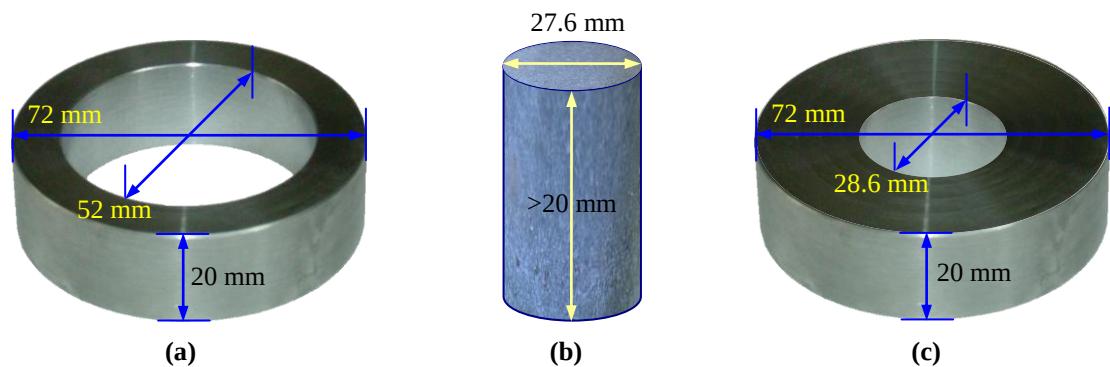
Dimensions of a) Steel-ring b) Rock core and c) Steel support ring
